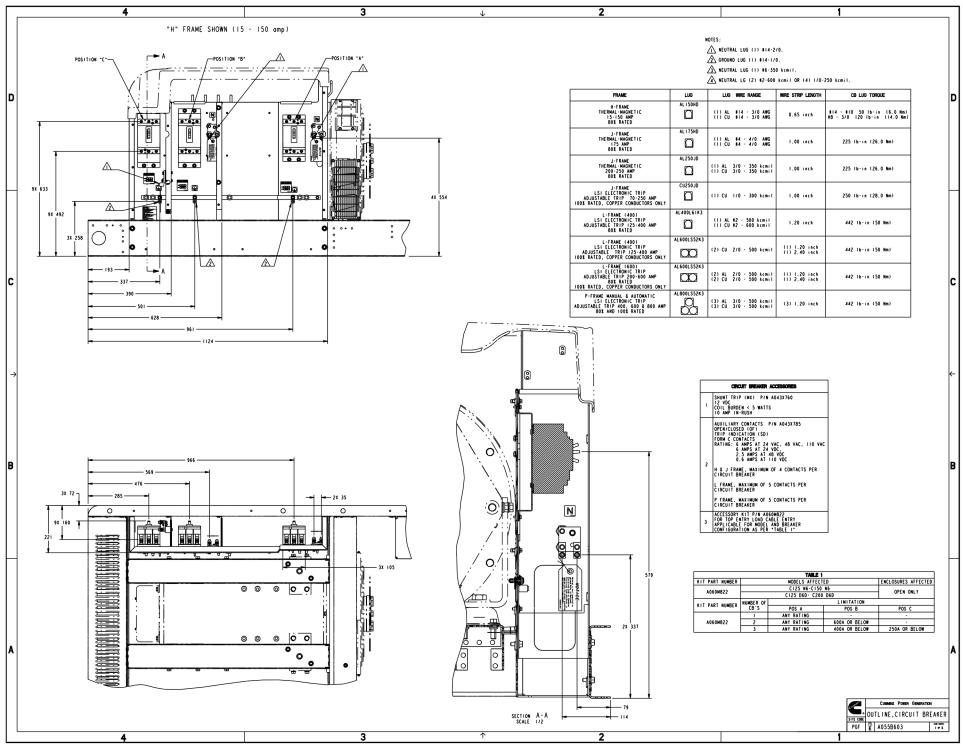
CIRCUIT BREAKER OUTLINE DRAWING (SHEET 1 OF 6)
